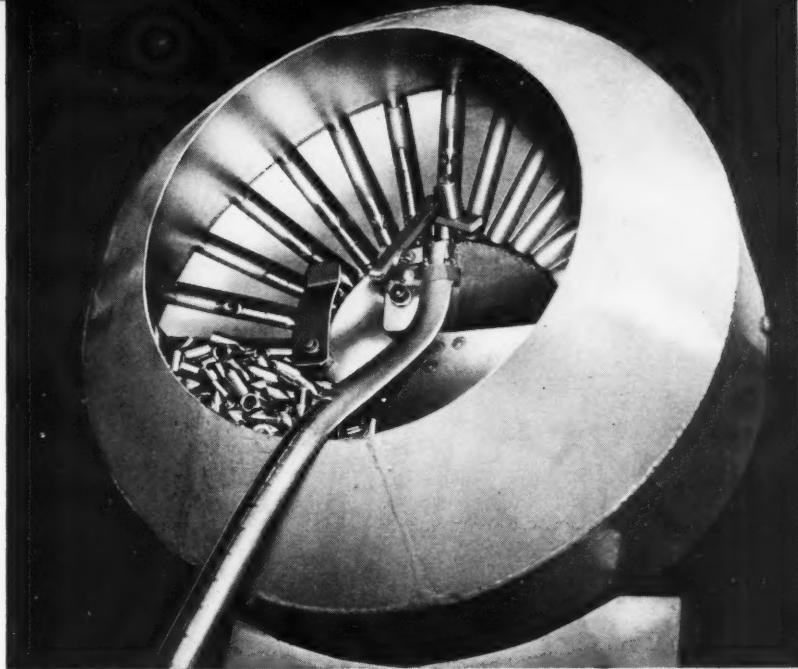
In this automatic hopper feed for a centerless grinding machine, two rollers are employed to insure that work-pieces enter the tube in the proper position, with the square-end first
